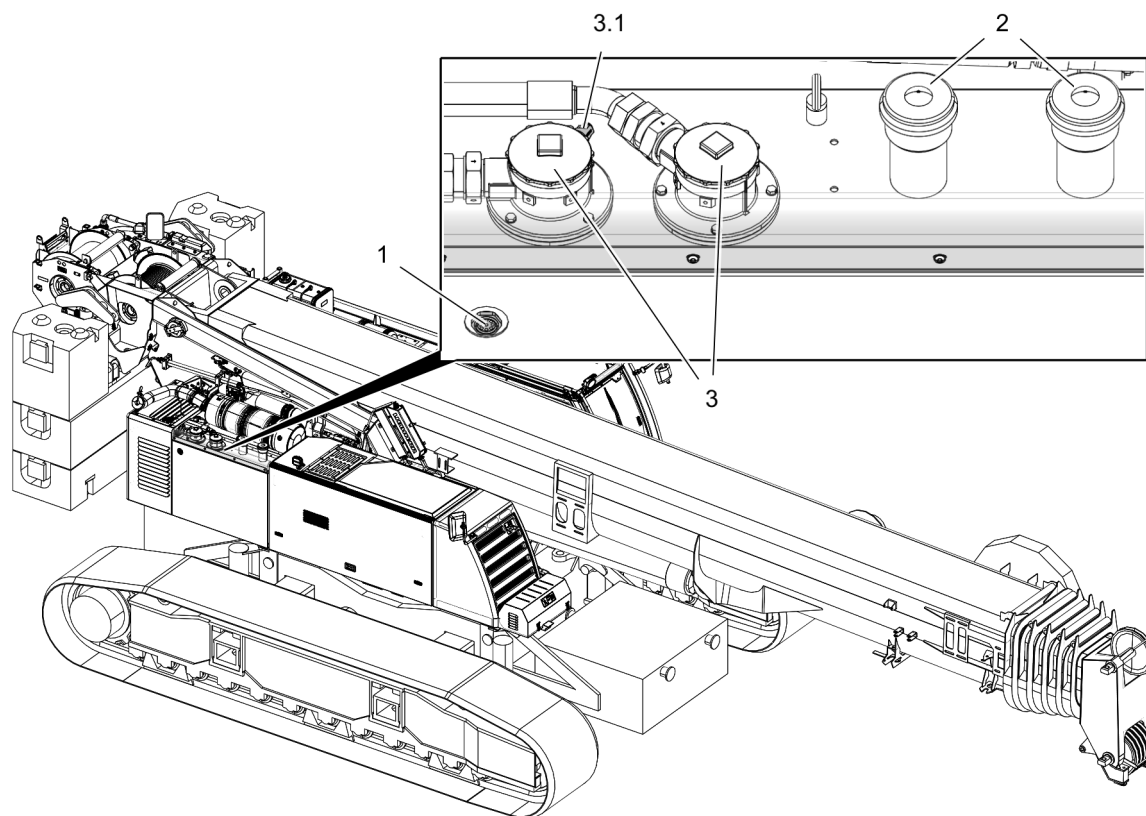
Hydraulic oil tank, hydraulic oil filter
